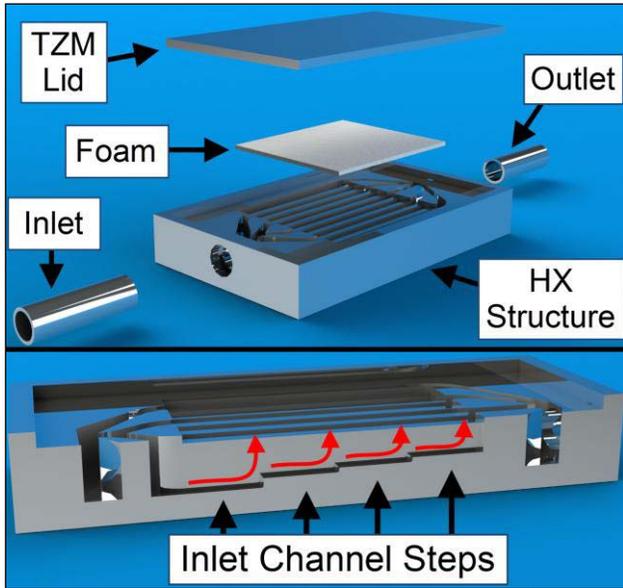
Exploded view of HX prototype (top), and section view (bottom) of inlet channel steps for redirecting helium flow [note: print copy is b&w, but color online].
